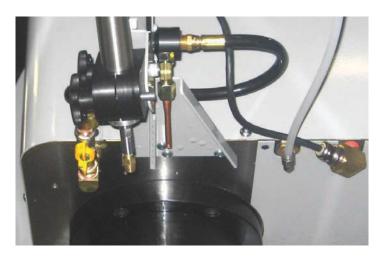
Typical installation of new Pcool without cable cover and coolant manifold
